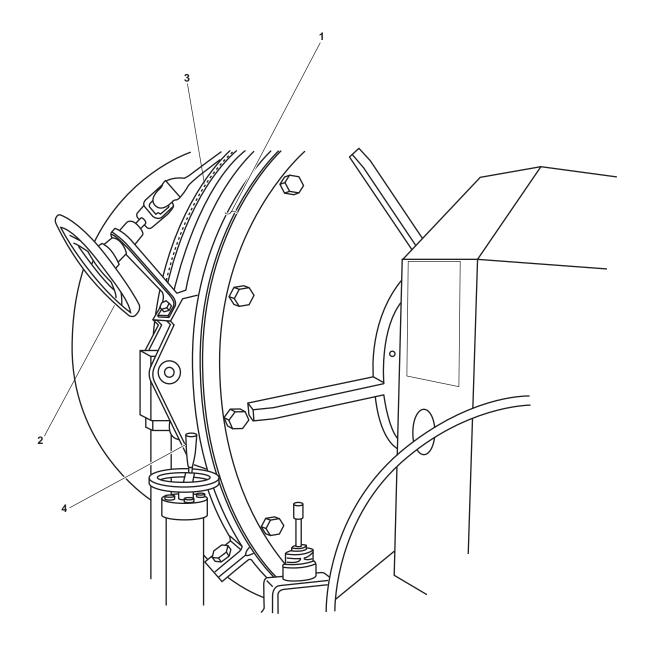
Towing Machine Clutch Brake and Auxiliary Brake
